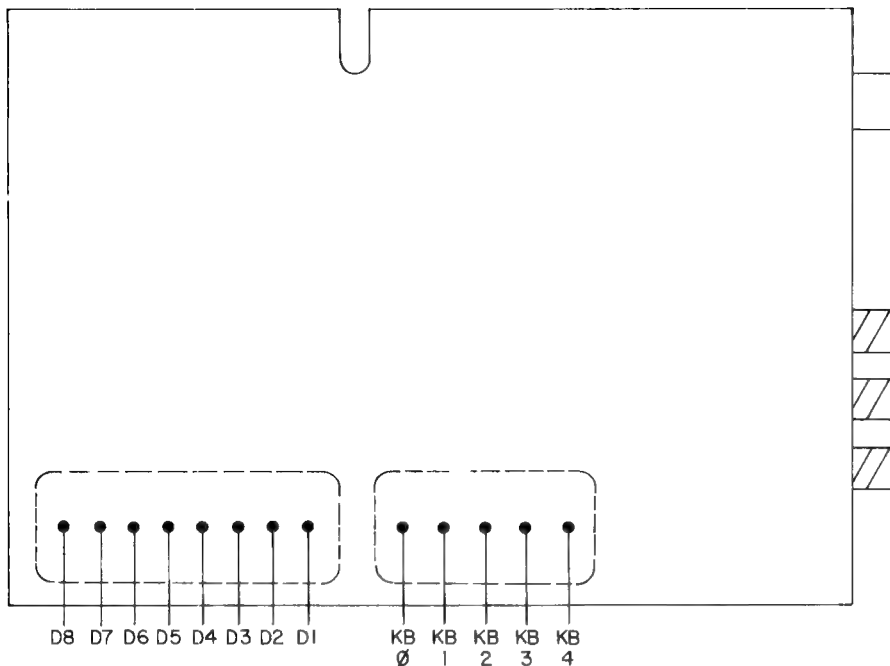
Solder side of ZX-81 PC board, showing solder points for keyboard ribbon sockets.
